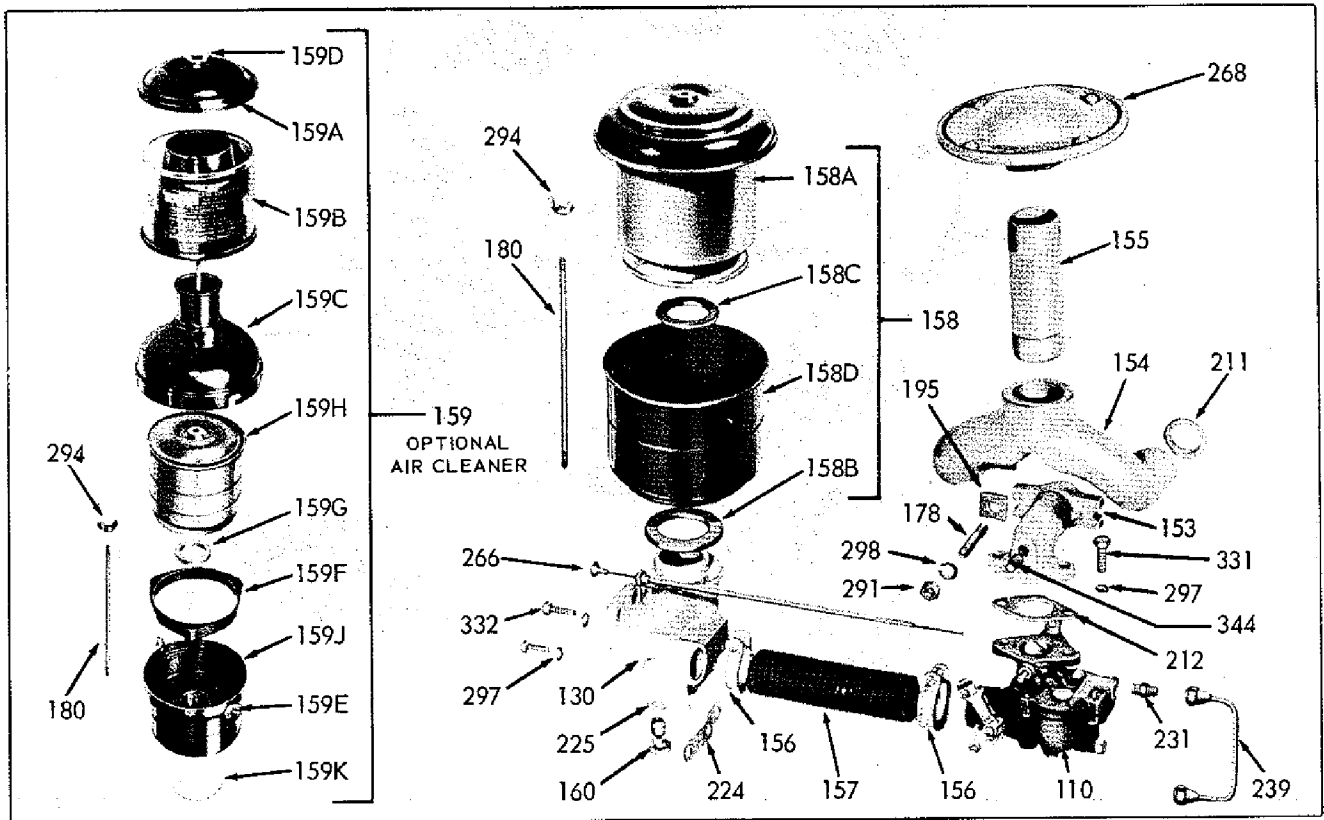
, CARBURETOR, MANIFOLD AND AIR CLEANER GROUP
